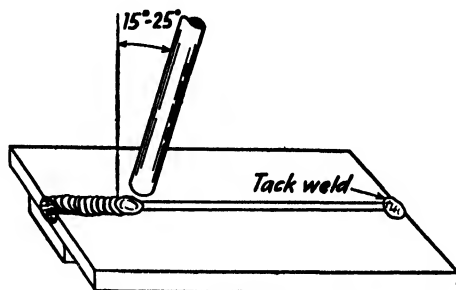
A backing strip is helpful in welding very thin metal and in cases of poor fit-up.
